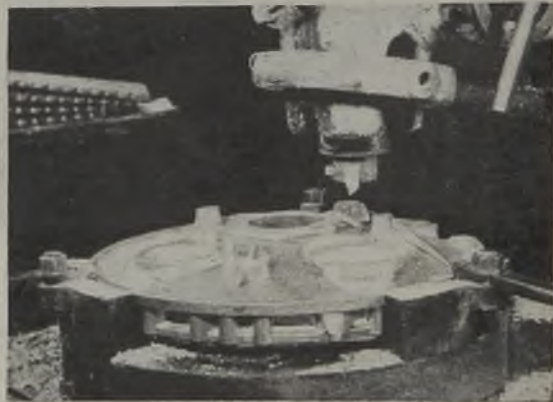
RECESSING BORES OF FRONT GEAR CASE COVER.
